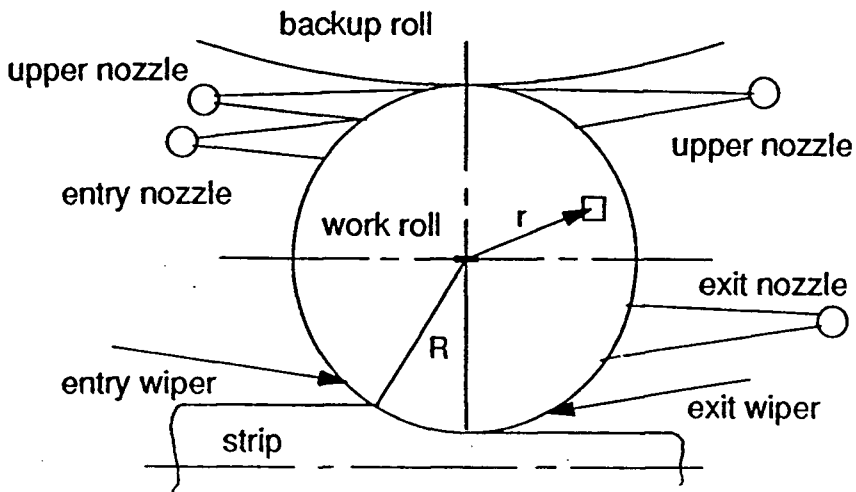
The arrangement with larger surface area of spray impingement from the exit-side spray.
